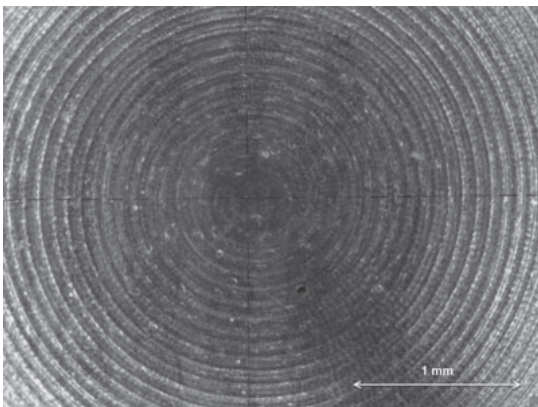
Part after toolpath 4 (enlarged 30-times)
